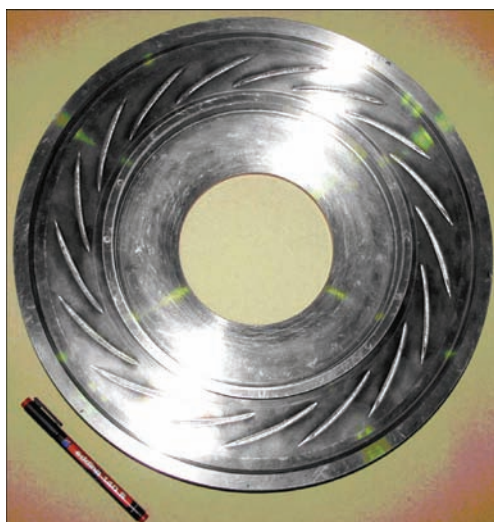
Contour of slot weld on the covering disc of diffuser relatively to the blade section
